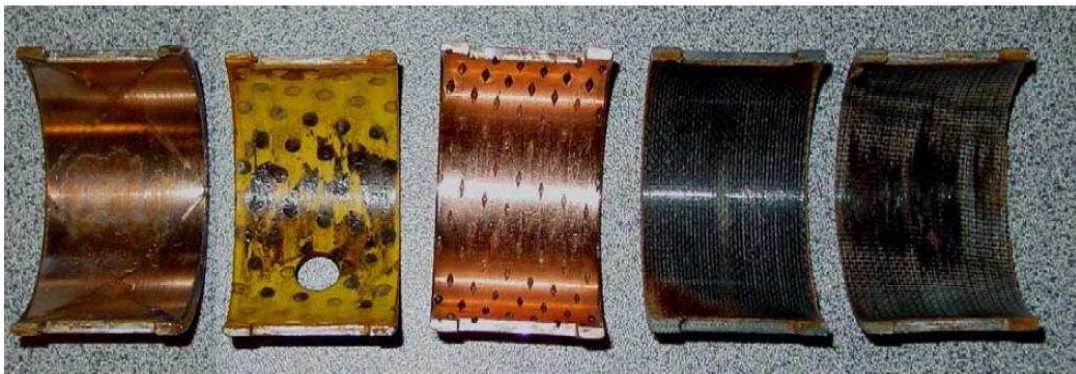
4: Worn bearings, from left: Deva, DEX, Tin Bronze, Orkot and Tufcot [14].
